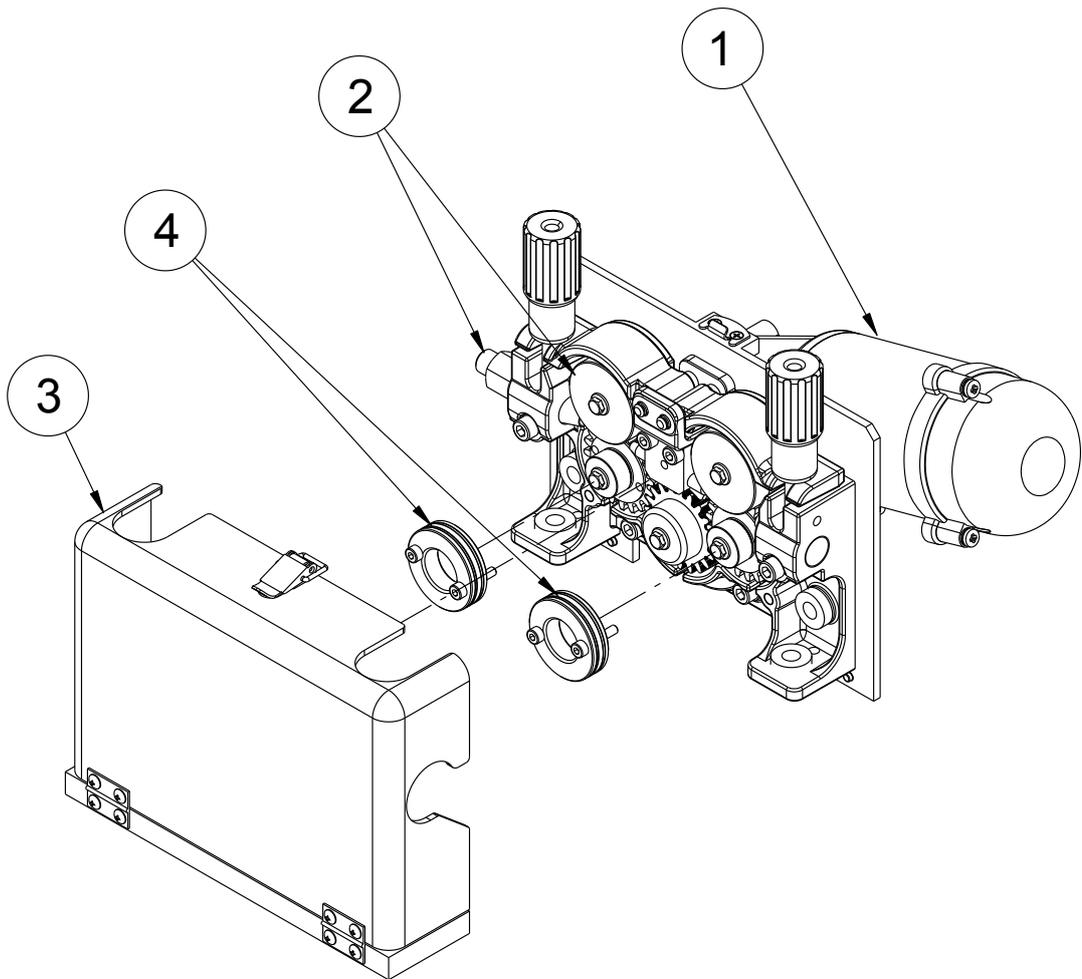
Exploded diagram of wire feeding unit (AF-4012)
